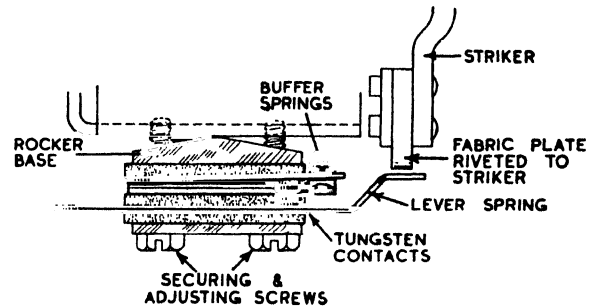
INTERRUPTER SPRING ASSEMBLY
